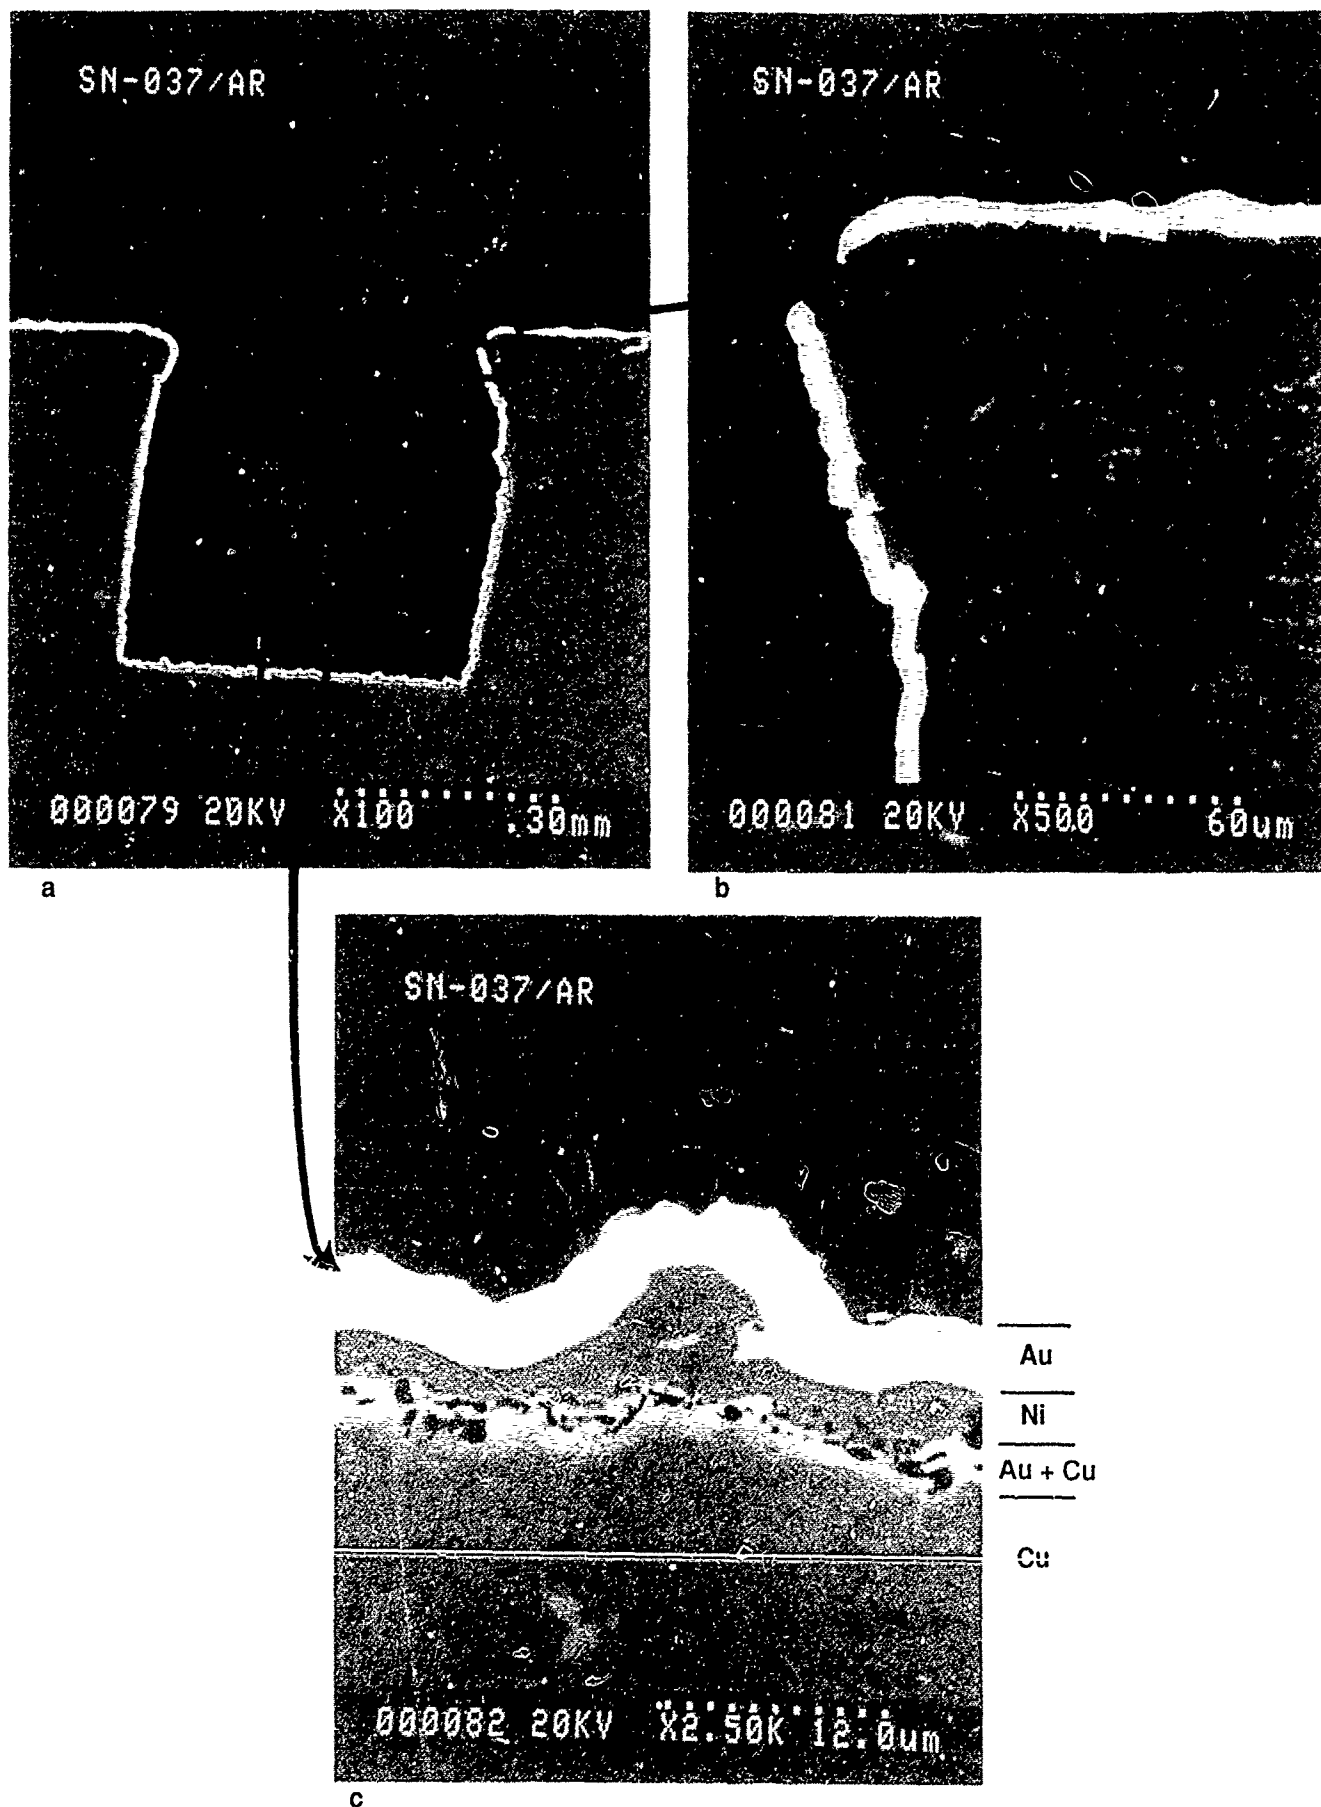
Cross Section of Untested Sample. Crack at the Top Corner is a Result of Mechanical Damage During Specimen Fabrication or Disassembly
